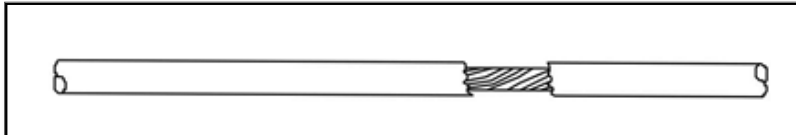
Torn or Cracked Cable Sheath that exposes cable
